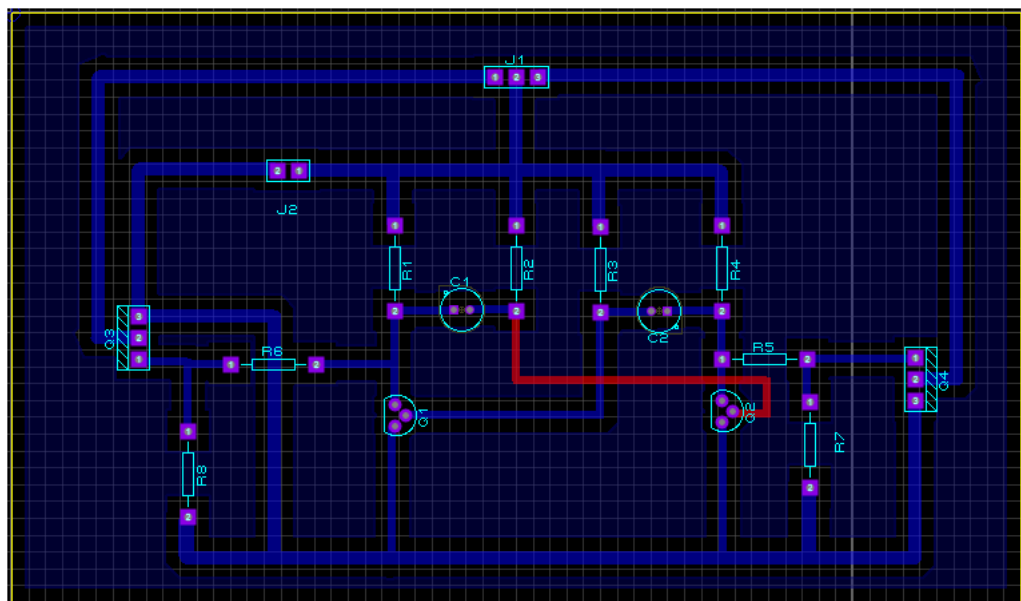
PCB Layout Design of Two Transistor Inverter
